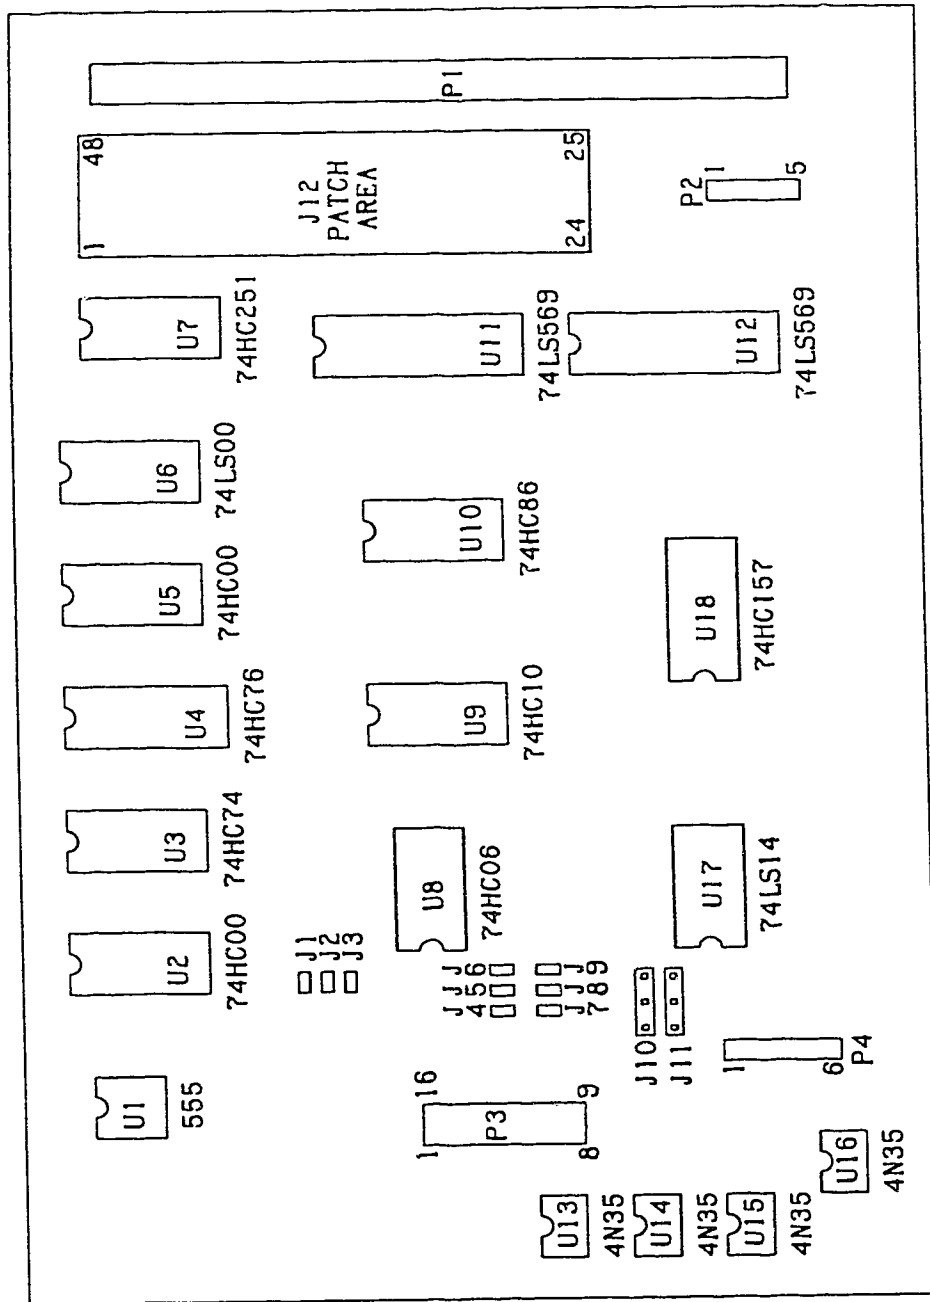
(sheet 1 of 2): Schematic of main stepper motor controller board.
